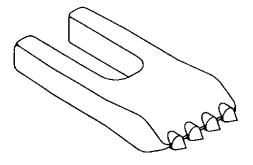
TX-50 series ("Bear Claw") Type Tooth Retained with rubber wedge. Drive out tooth with punch to remove. Install rubber wedge and install tooth. DO NOT hit carbide tips with hammer.
